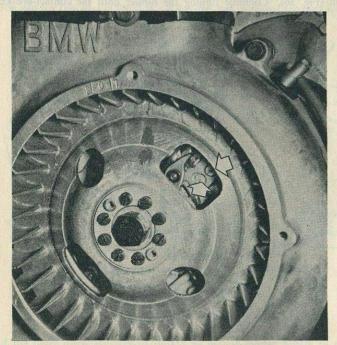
ISETTA CONTACT-BREAKER POINTS
